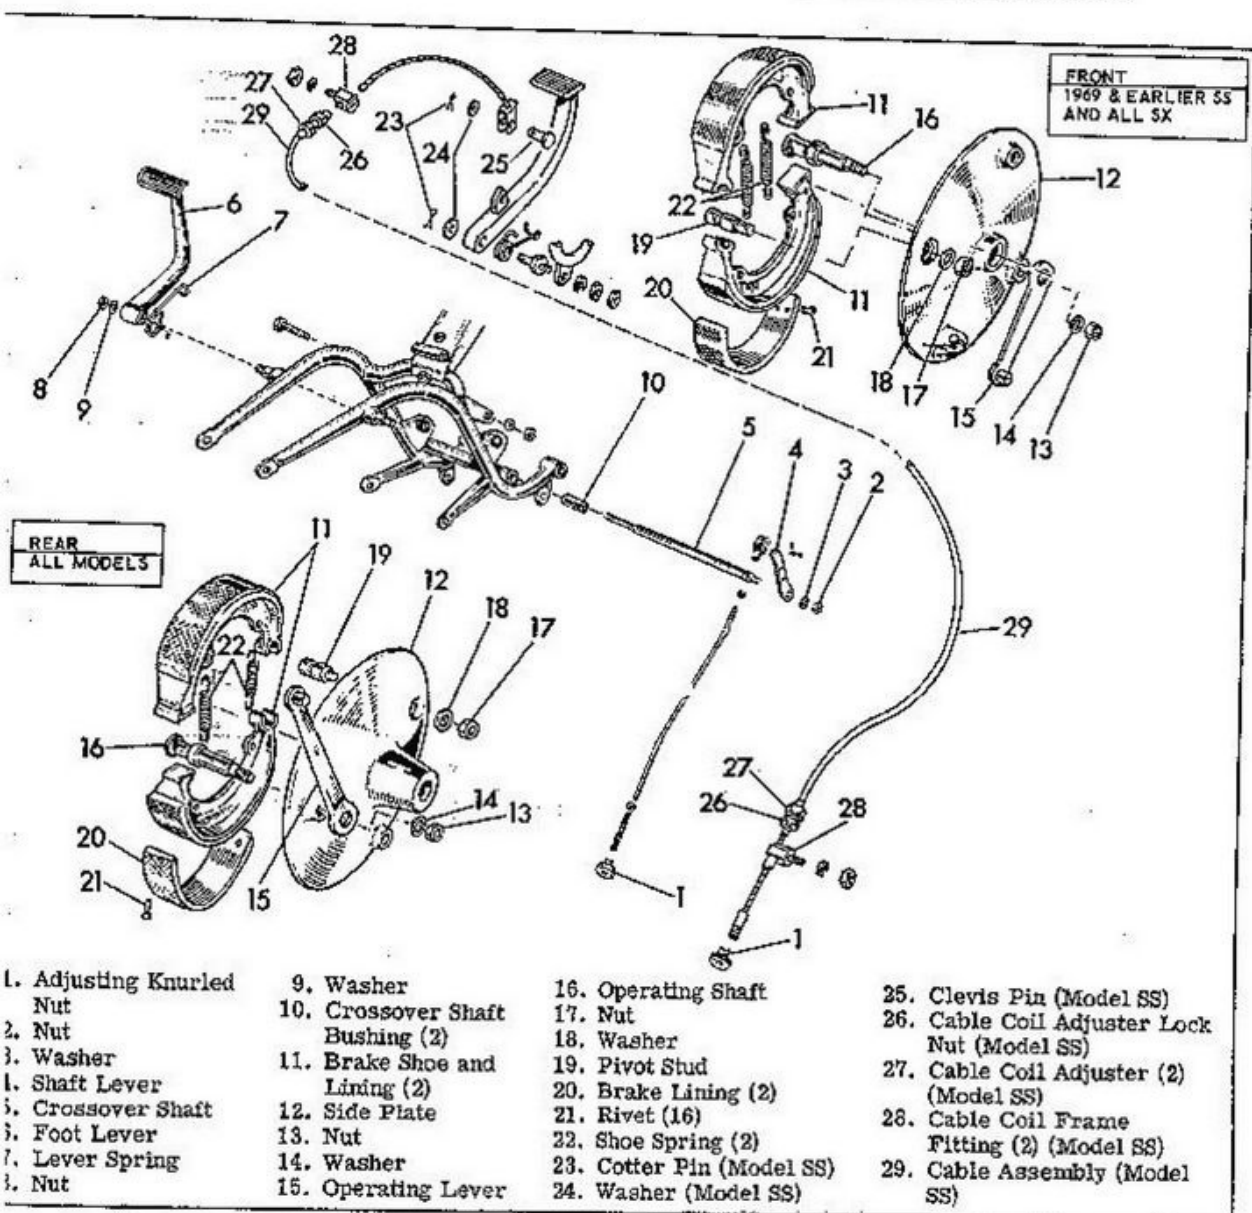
G-33. Front and Rear Brakes (Except SS Double Front Type) - Exploded View
